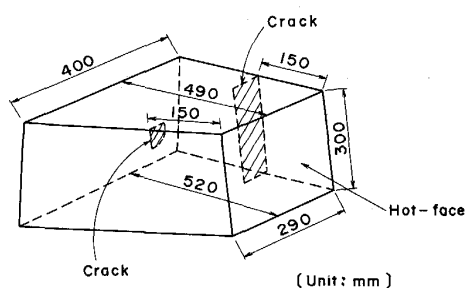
Typical cracks appeared in carbon block at side wall of model furnace.
